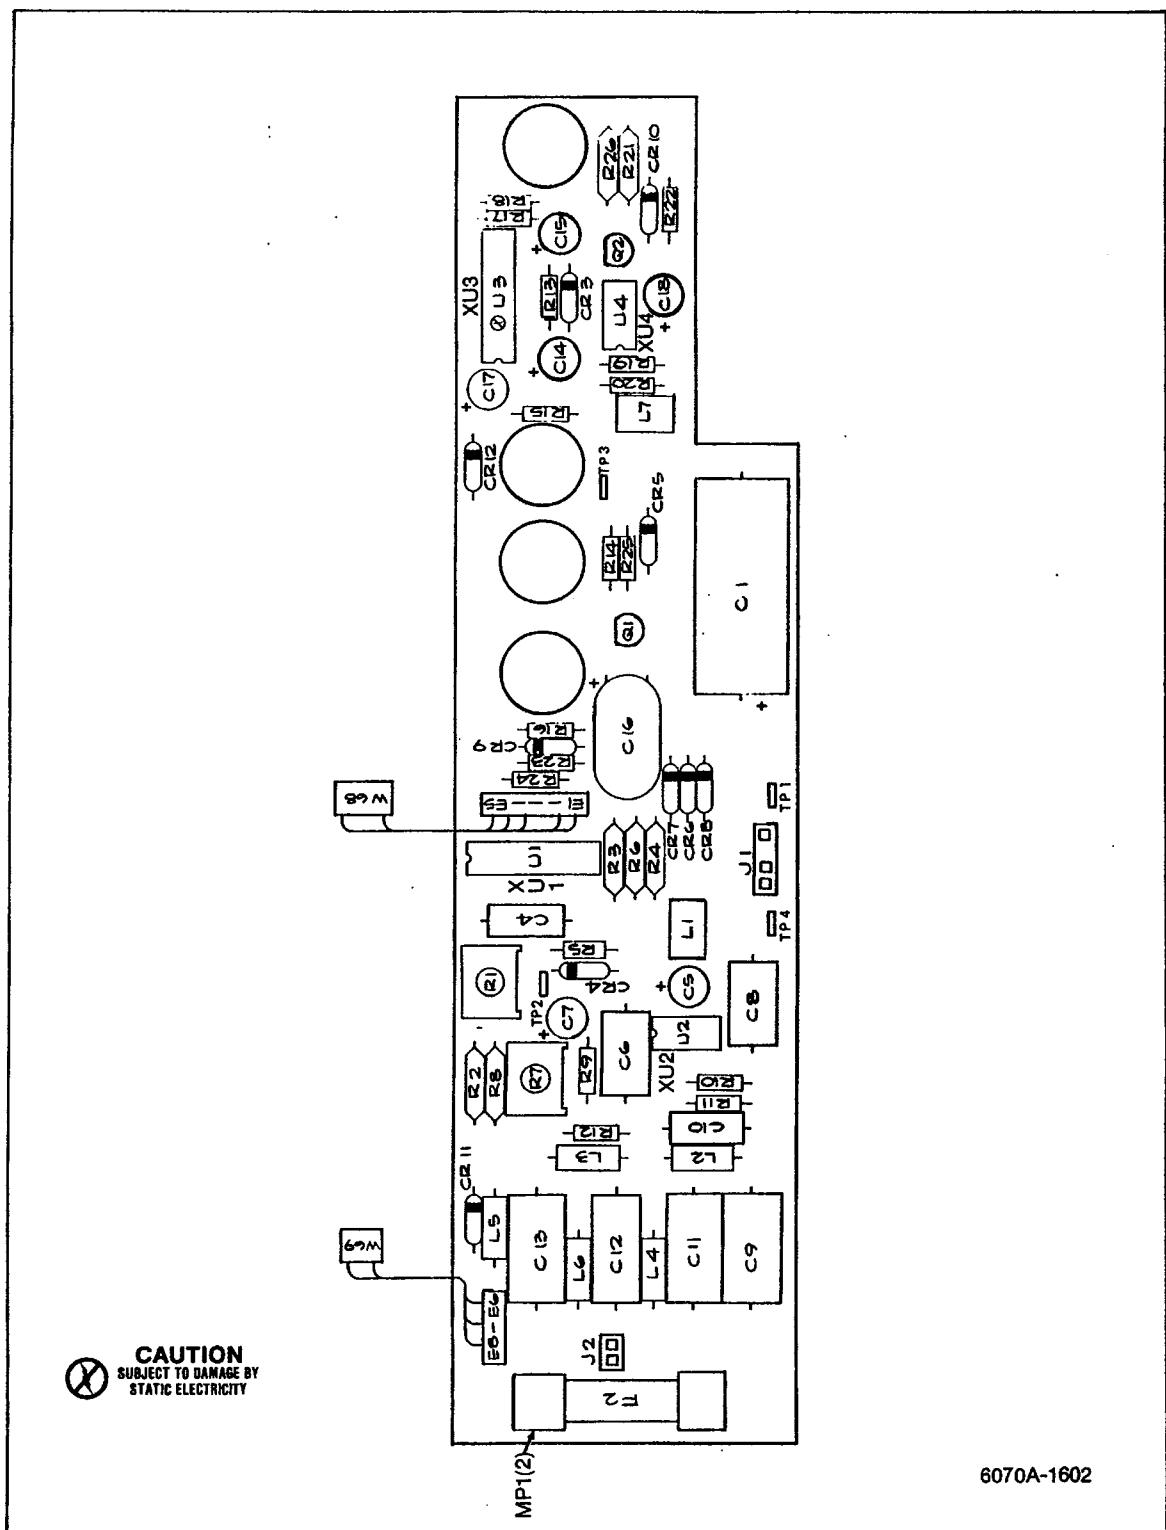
A5A2 P/S Regulator PCB Assembly
